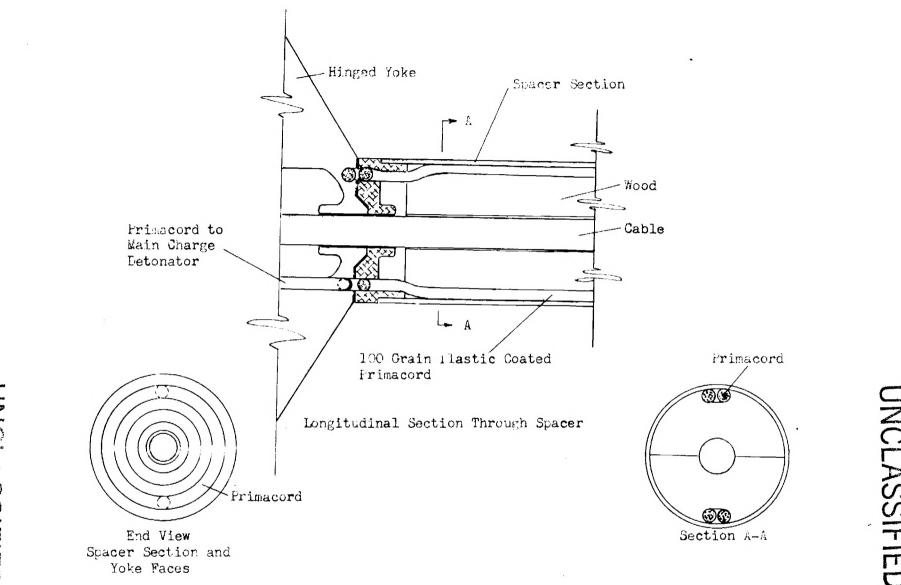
Arrangement of Primacord for Removing Spacer Sections from Streamer Tow Cable
